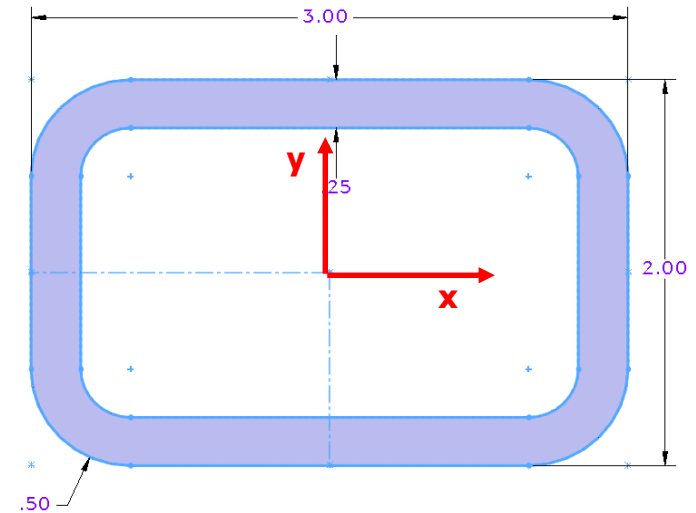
Weldment profile cross-section (dimensions in inches)
